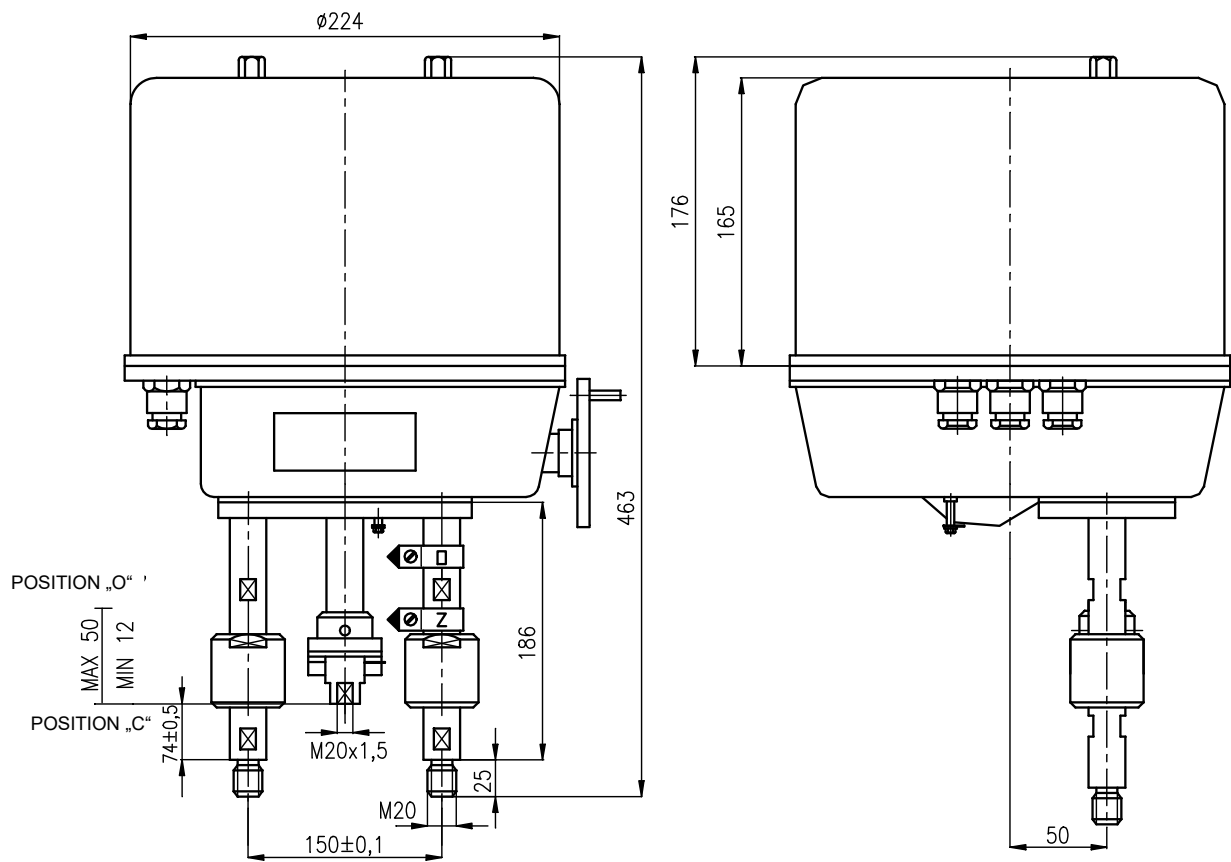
DIMENSIONAL DRAWING - CONNECTION P8
